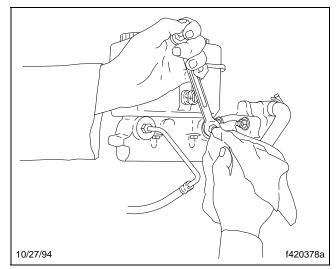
, Loosen the Fitting at the Rear Outlet Port
